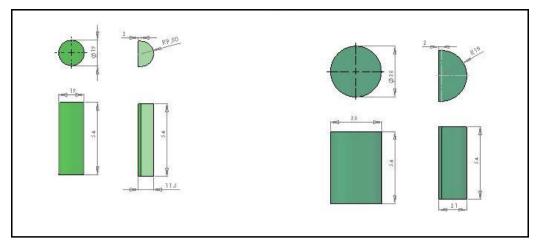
Circular and semi-circular tubes for both 38 mm and 19 mm in diameter
